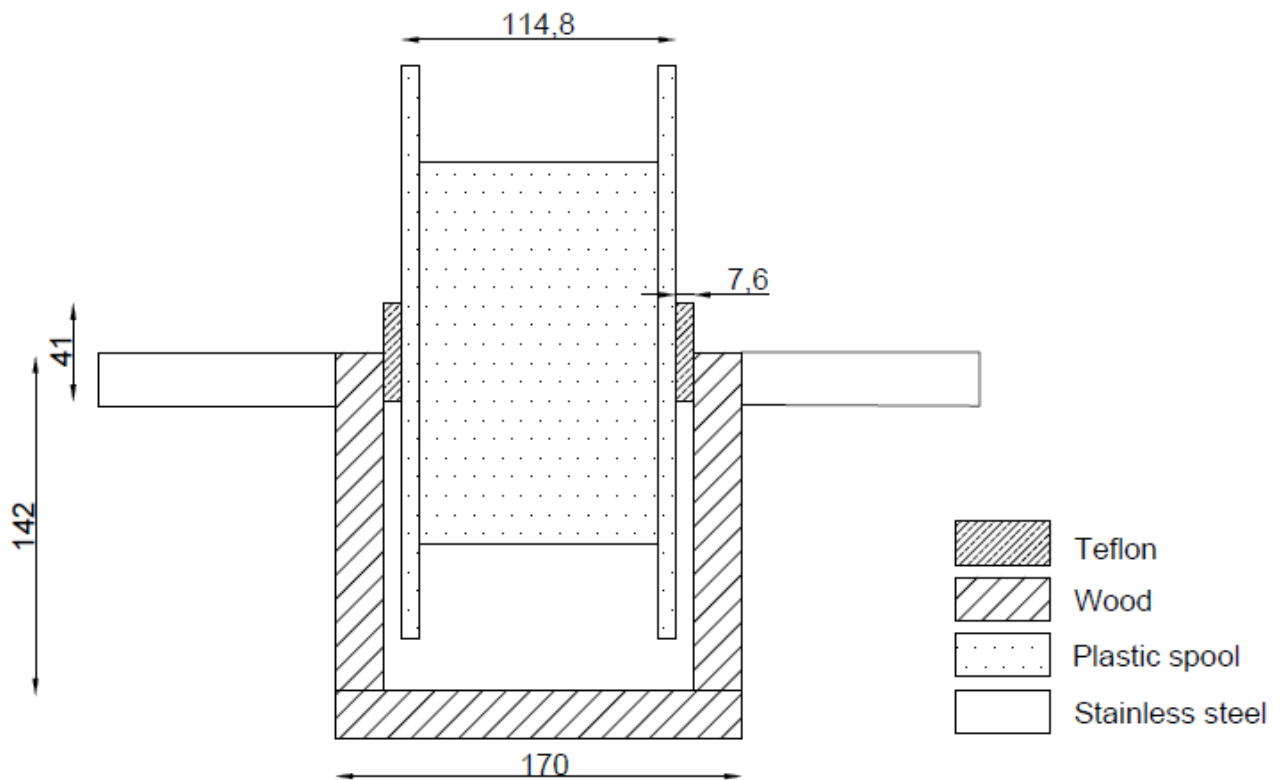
Mechanical drawing of Unit 1 - feed of optical fibre (side view; dimensions in mm)
